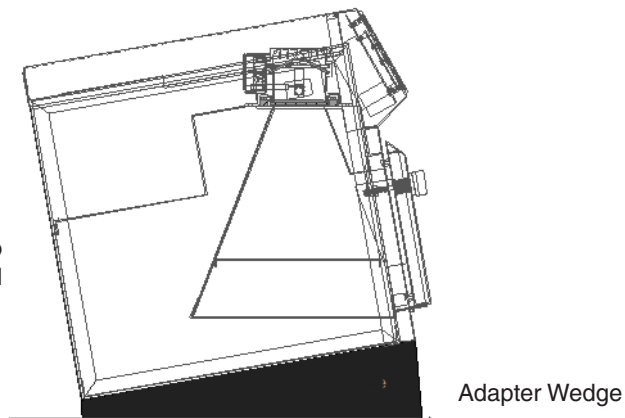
Side view Xe-1 with adapter wedge showing horizontal specimen tray.
